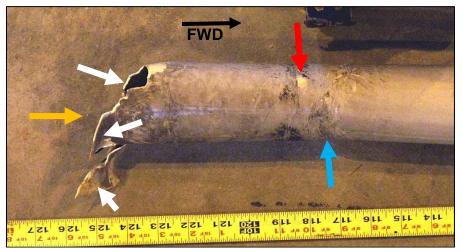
The fractured rear end of the tail rotor rear drive shaft.
